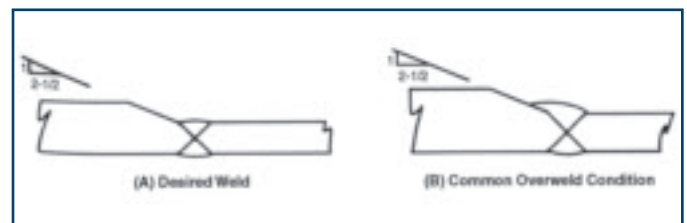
Potential overwelding of transition butt joints: A — Desired weld; B — common overweld condition.
